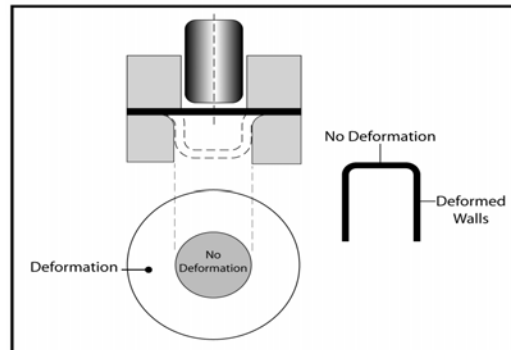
B-47: A circular blank is formed into a cylindrical cup by the deep drawing, radial drawing, or cup drawing method of deformation.
